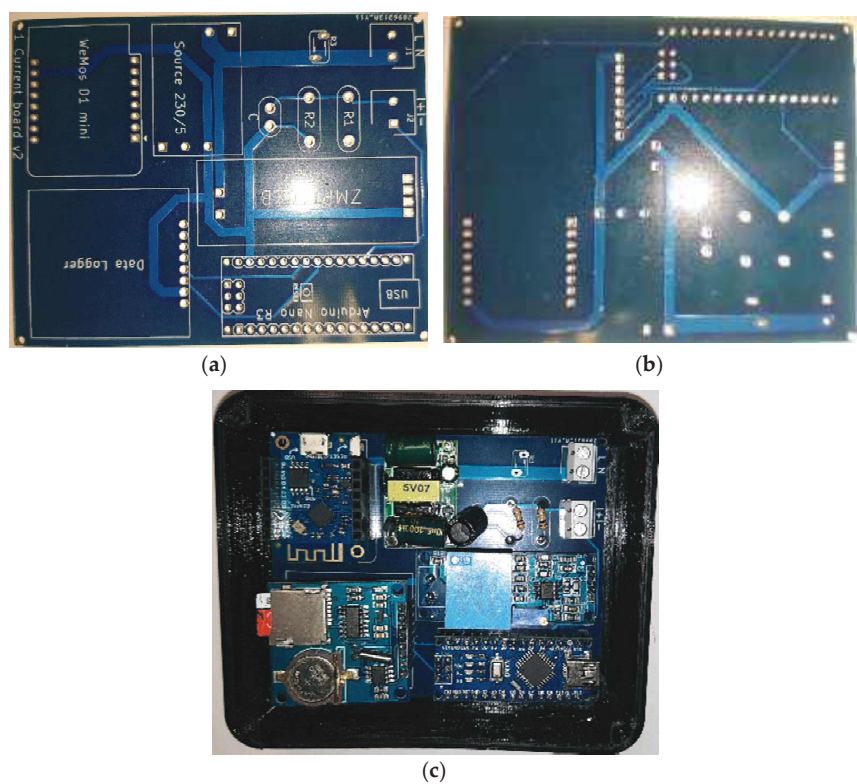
Printed circuit board (PCB) of the SMH with battery power supply: (a) front side: (b) back side and (c) assembled with real components.
